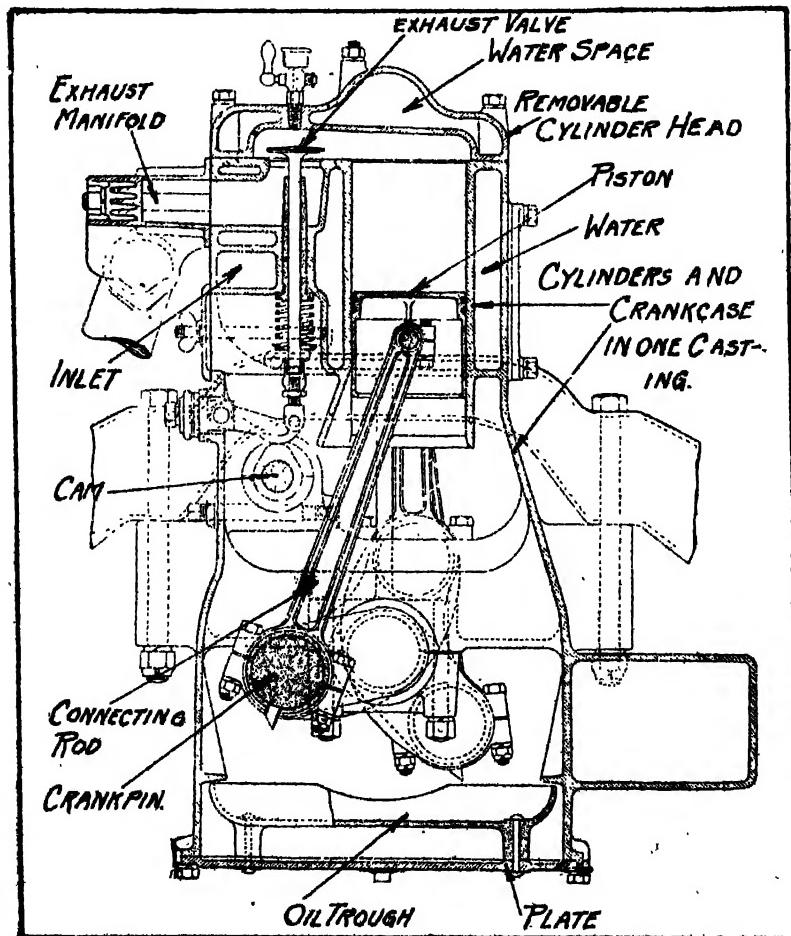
End Sectional View of Lewis Six Cylinder Motor Showing Unconventional Construction in Which Cylinders and Crank Case are Formed Integral.
